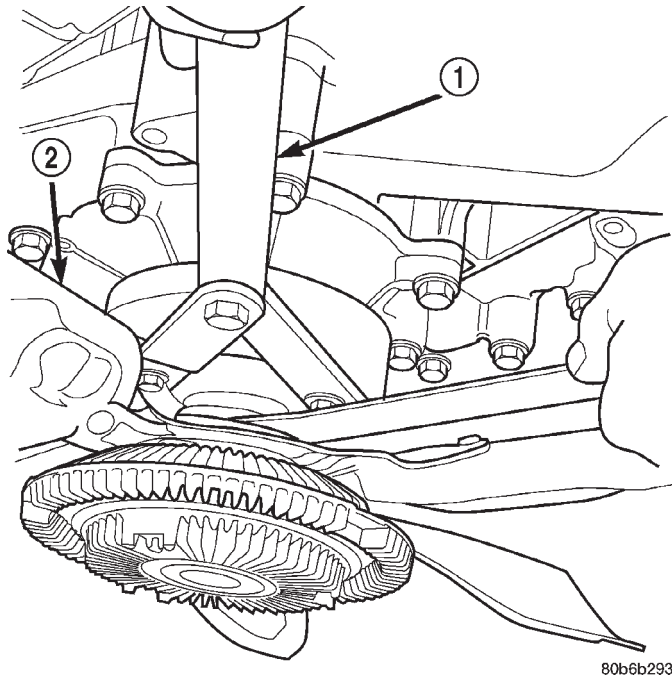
Using Special Tool 6958 Spanner Wrench and Adapter Pins 8346
